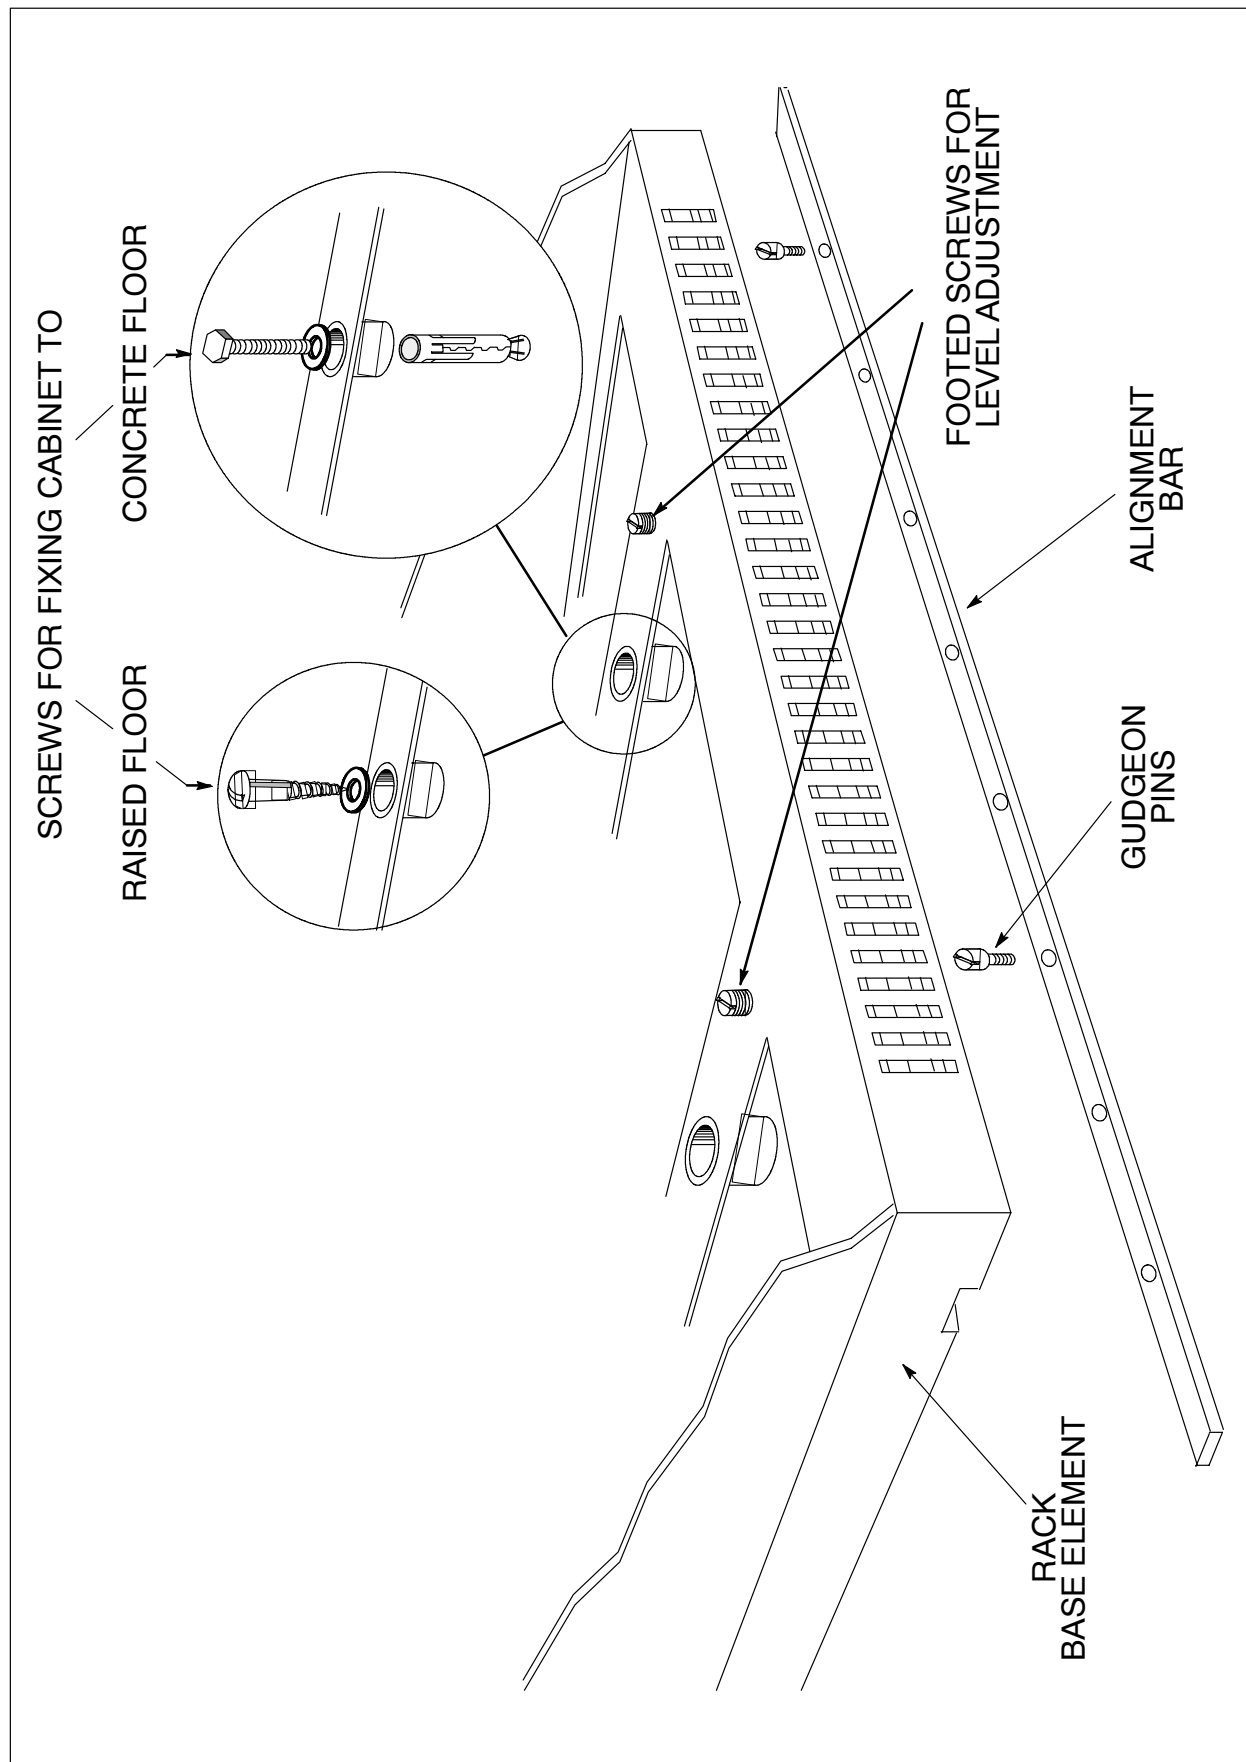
Cabinet mounting – view of cabinet base element – front or rear side
